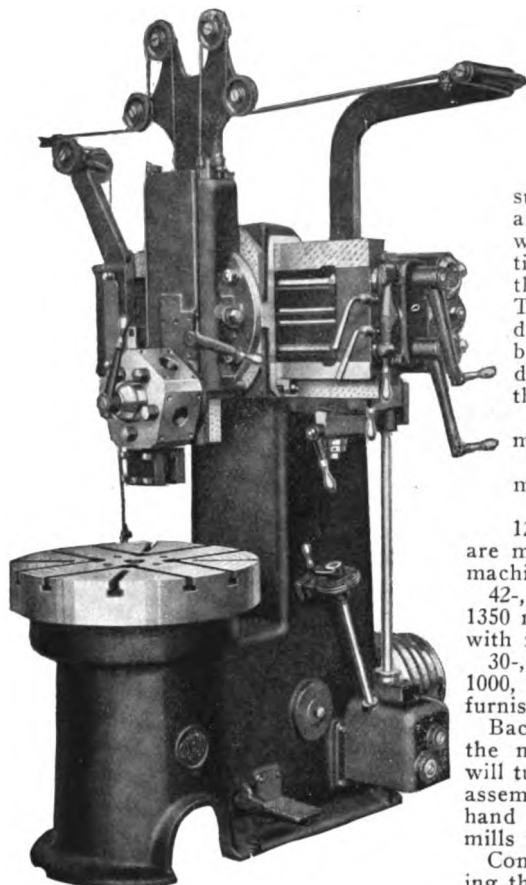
Gisholt Single-Head Vertical Boring Mill
